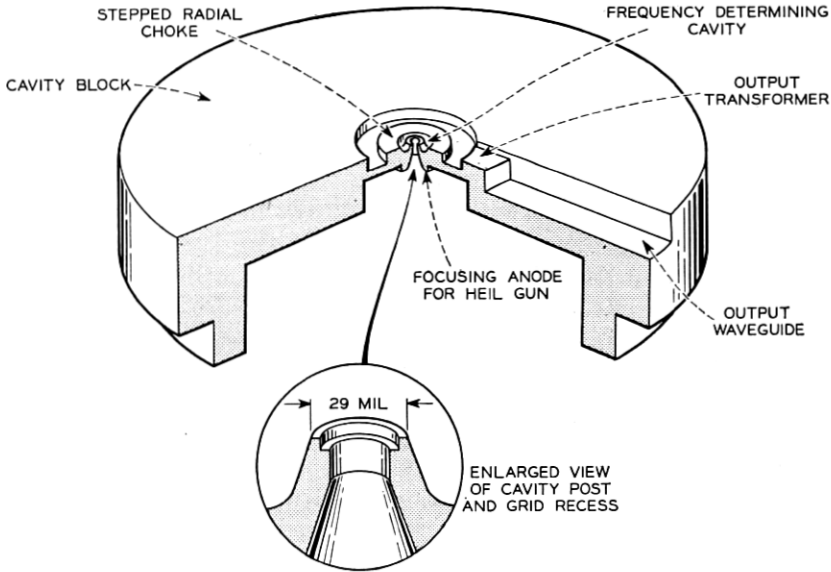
Cutaway view of completed cavity block. Made from a solid copper blank by the process outlined in Fig. 10, this unit really constitutes the heart of the tube.
